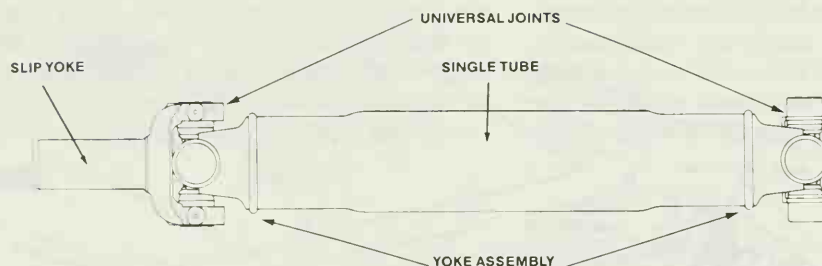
A single tube drive shaft with universal joints at each end. (Buick Motor Division of General Motors Corporation)
